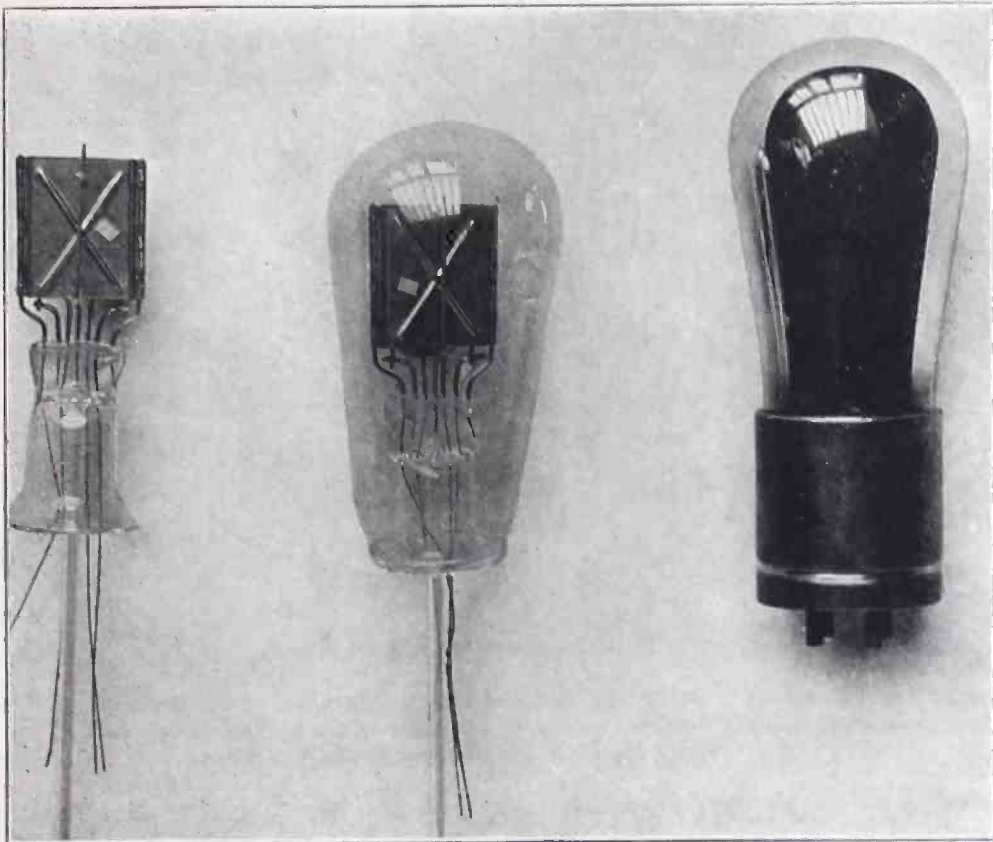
A Tipless-Tube "Mount," Before and After Sealing In; and, to the Right, the Finished Tube. The tip is concealed in the base.
